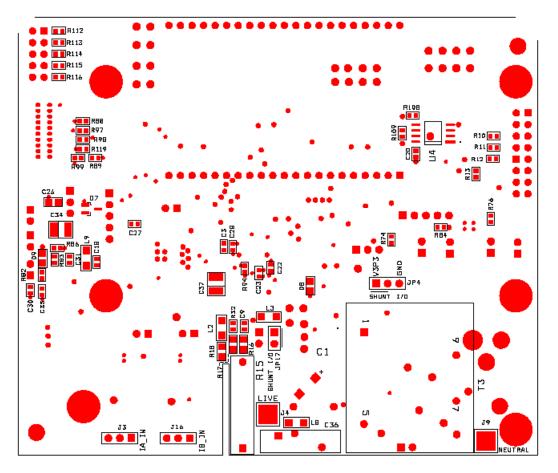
71M6511 2-Layer Demo Board (Xformer Power Supply): Bottom View
